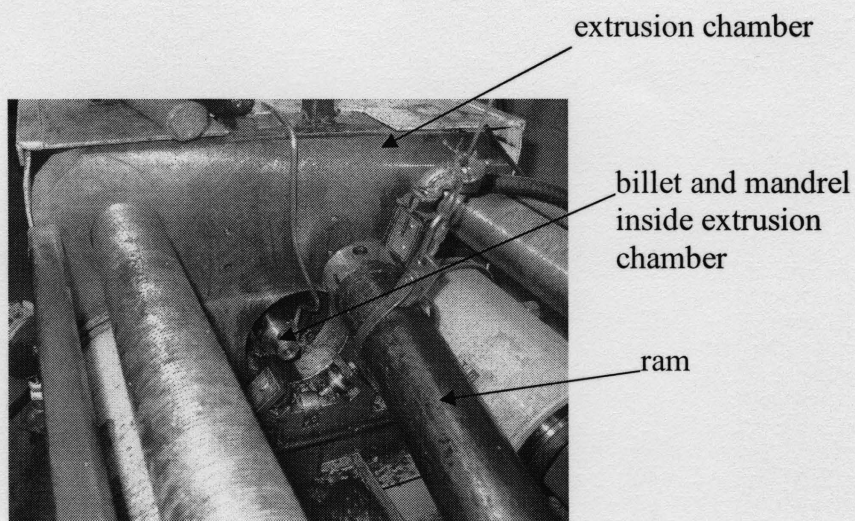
Insertion of billet with mandrel into extrusion chamber.
